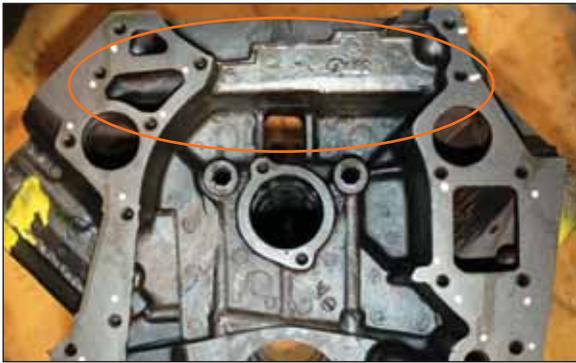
The second design 6.9L casting has a wide gusset across the top front of the block. This casting is considered the only viable casting for rebuilding by most.
